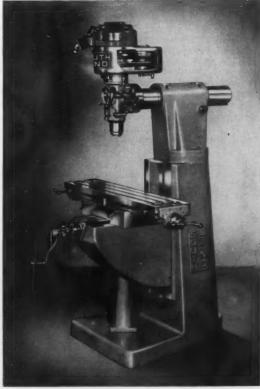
Precision vertical milling machine to be exhibited by South Bend Lathe Works
